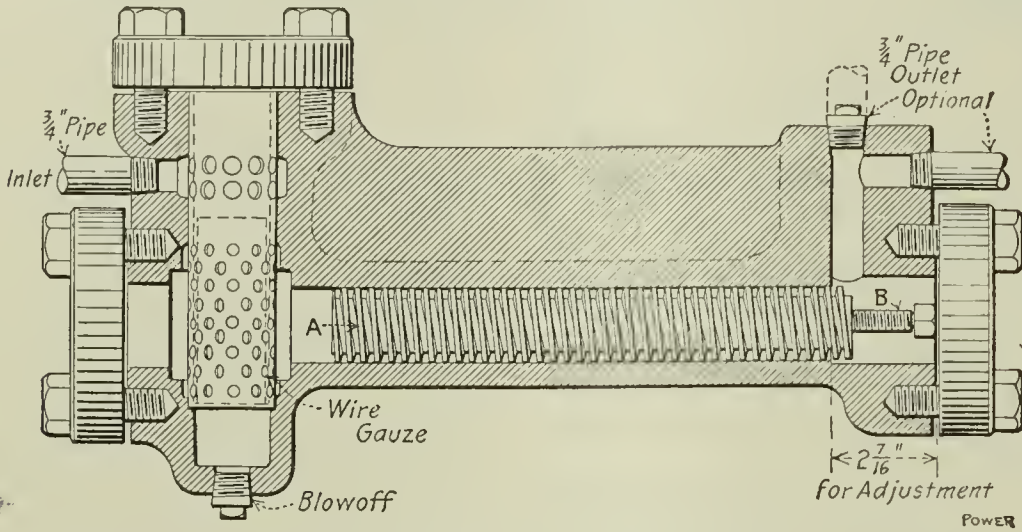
BAFFLE USED BETWEEN OIL PUMP AND STEP BEARING
